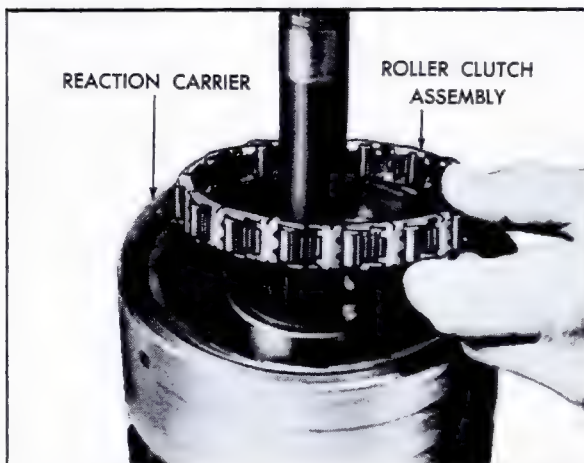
Installing Roller Clutch in Reaction Carrier
